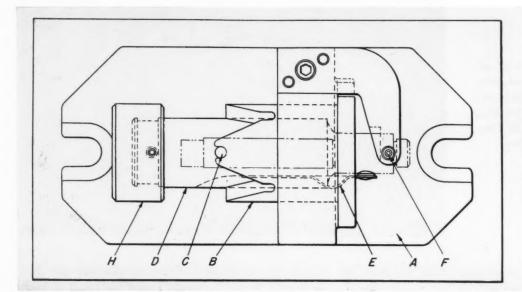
Details of the Drilling Fixture Shown in Fig. 12. Indexing Pin C Locates the Work by Engaging the V-shaped Notches in One End of Bushing B
